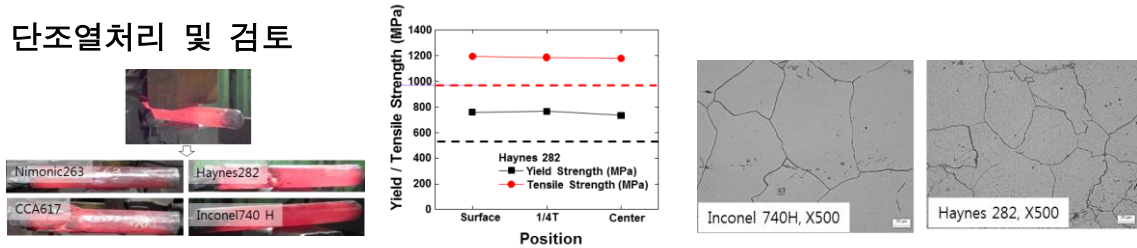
Actual forging product and test results for HSC rotor superalloy
